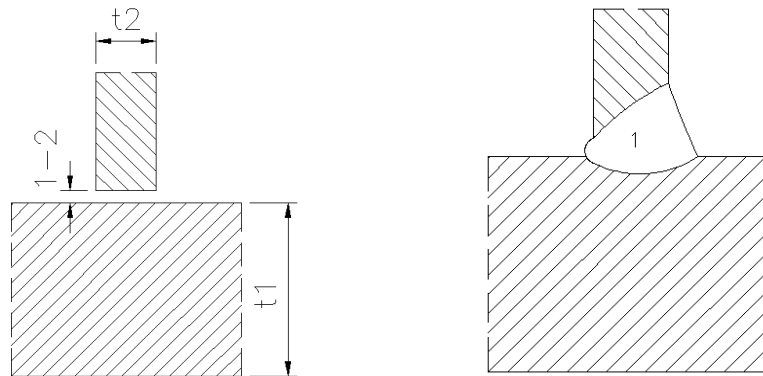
(a) Groove shape; (b) Welding method
